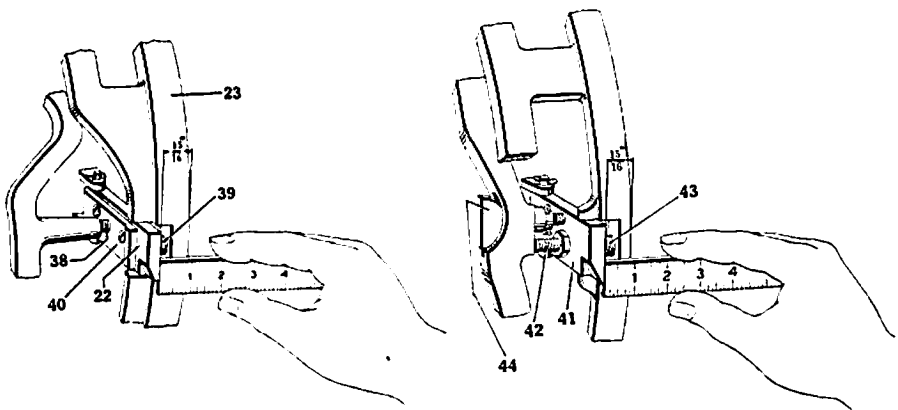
Stopping Pawl and Safety Pawl Adjustments. The automatic stopping pawl 22 and the safety pawl 41 should be set $15/16''$ from the edge of the delivery and elevator transfer cam, as illustrated. Pawl 22 is set by means of screw 38; pawl 41 is adjusted by means of a similar screw 42.
